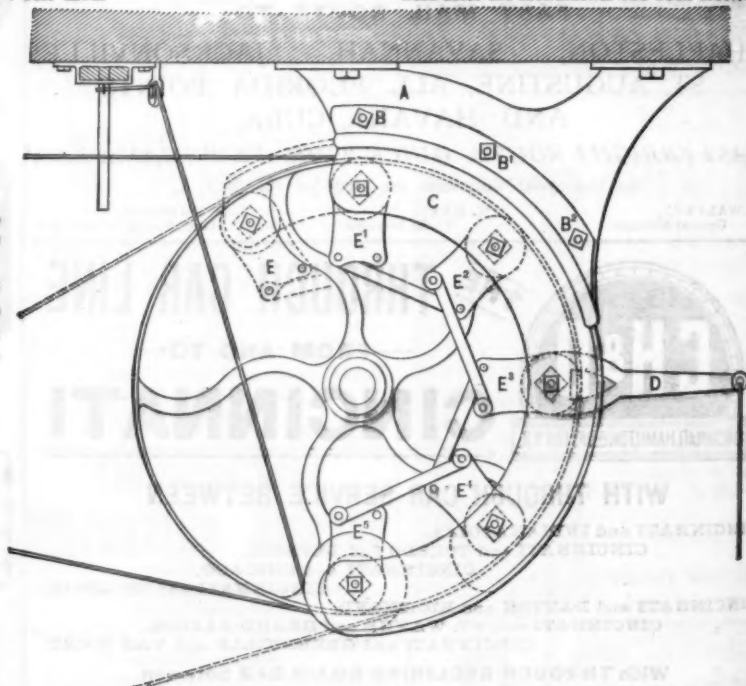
SECTIONAL VIEW OF BELT HOLDER AND SHIFTER.
